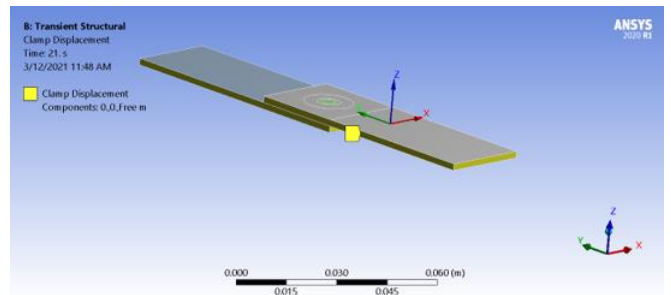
An image of the clamping constraints on the single spot weld geometry.
